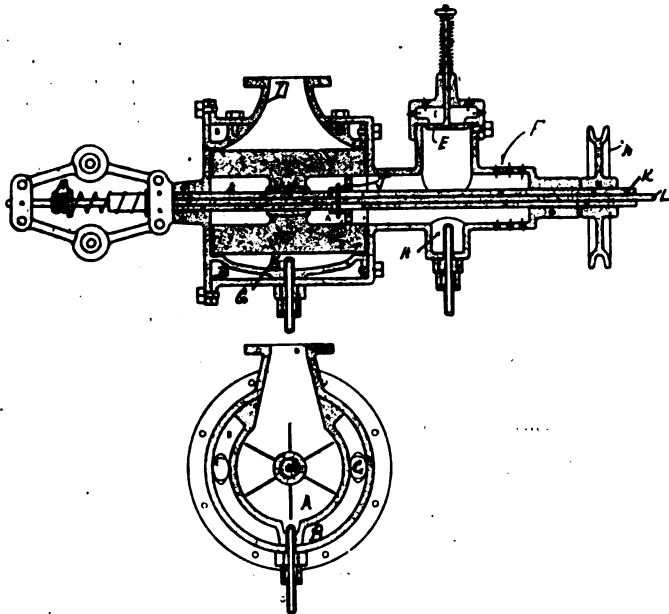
Sectional Views of Davis Paraffin Carburettor.
